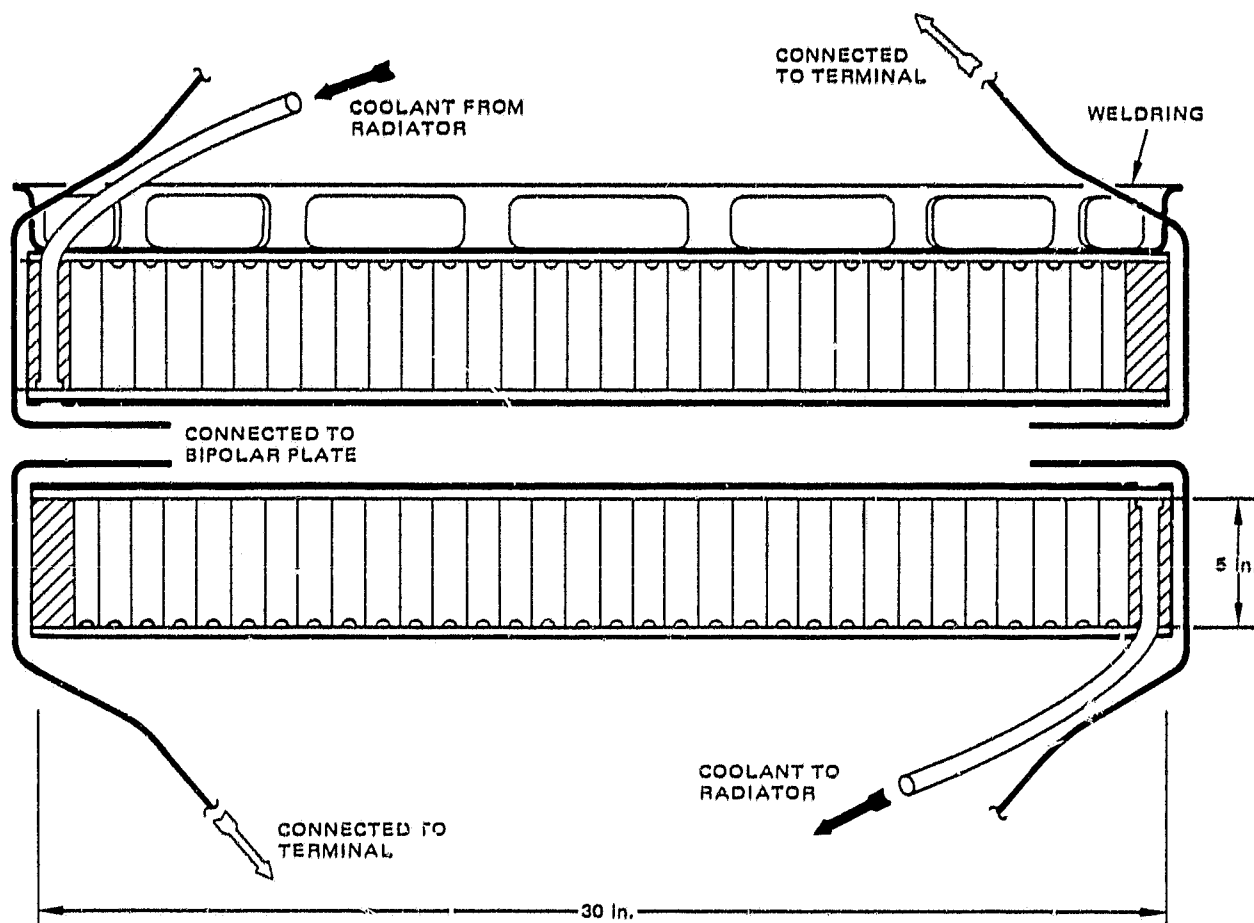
END PLATE/WELDRING ASSEMBLY
